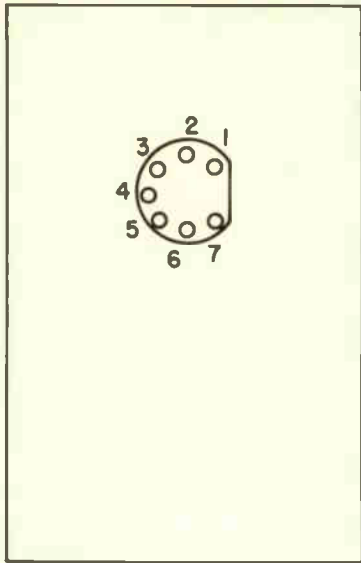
Identifying the tube socket pins on the etched circuit board.
